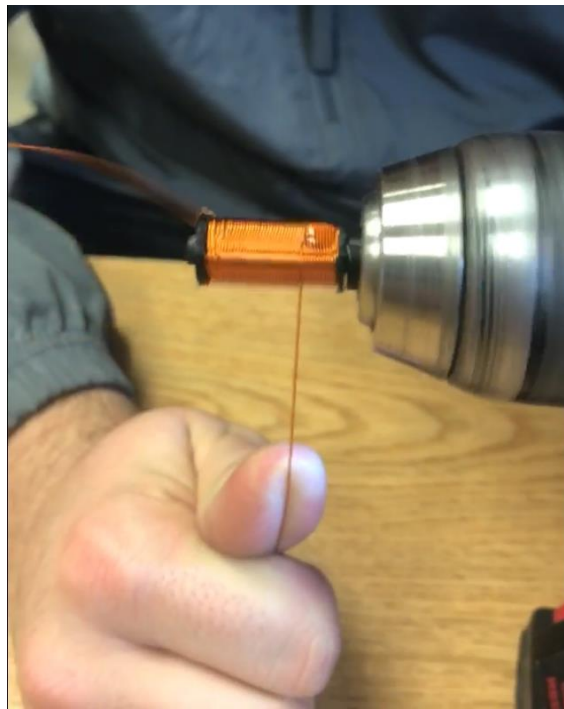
COIL WINDING WITH DRILL MOTOR
